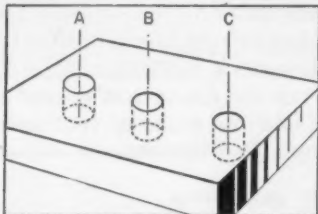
In grinding three holes to size, A and B are roughed to within .001"-.002", and C within about .005". Using a freshly charged mandrel, C is finished to size, thereby breaking down the high points on the tool. A and B may now be safely ground to size.
